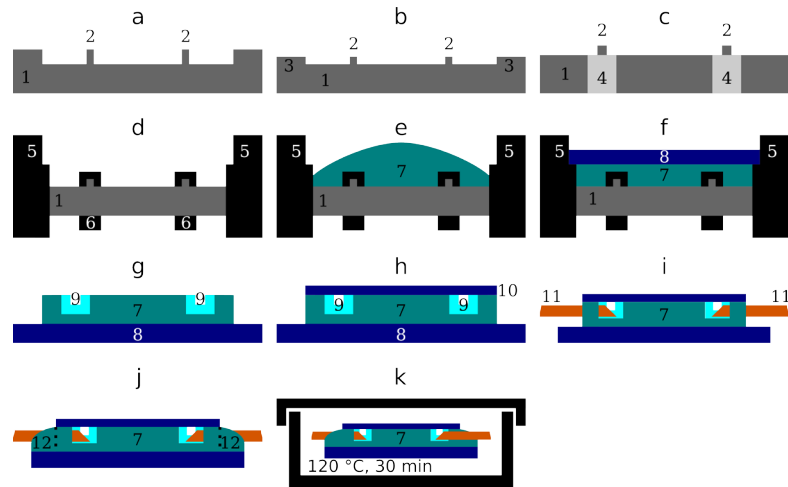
Schematic overview of the mould fabrication process. First the channel structure is milled in brass (1; a), followed by polishing of the channels (2; b). After, the polishing support (3) is removed using milling, and holes are drilled (4) through the mould at the place of the connection chambers (c). Rods are placed in the holes (6), and mounted to the desired height (d). A ring (5) is used to support the glass (8) during polymerization of the PDMS (7; e, f). After, the flow cell is removed, cut to the desired size, and placed onto a microscope glass (8; g). Using an oxygen plasma treatment, a coverslip (10) is covalently bound to the PDMS (h). Then the closed flow cell is injected using beveled glass capillary tubes (11) until the connection chambers (9) are reached (i). Finally, extra PDMS is poured over the glass slide and the capillary tubes, to secure the connection (12; j). Before use, the flow cell is sterilized using an autoclave (k).
